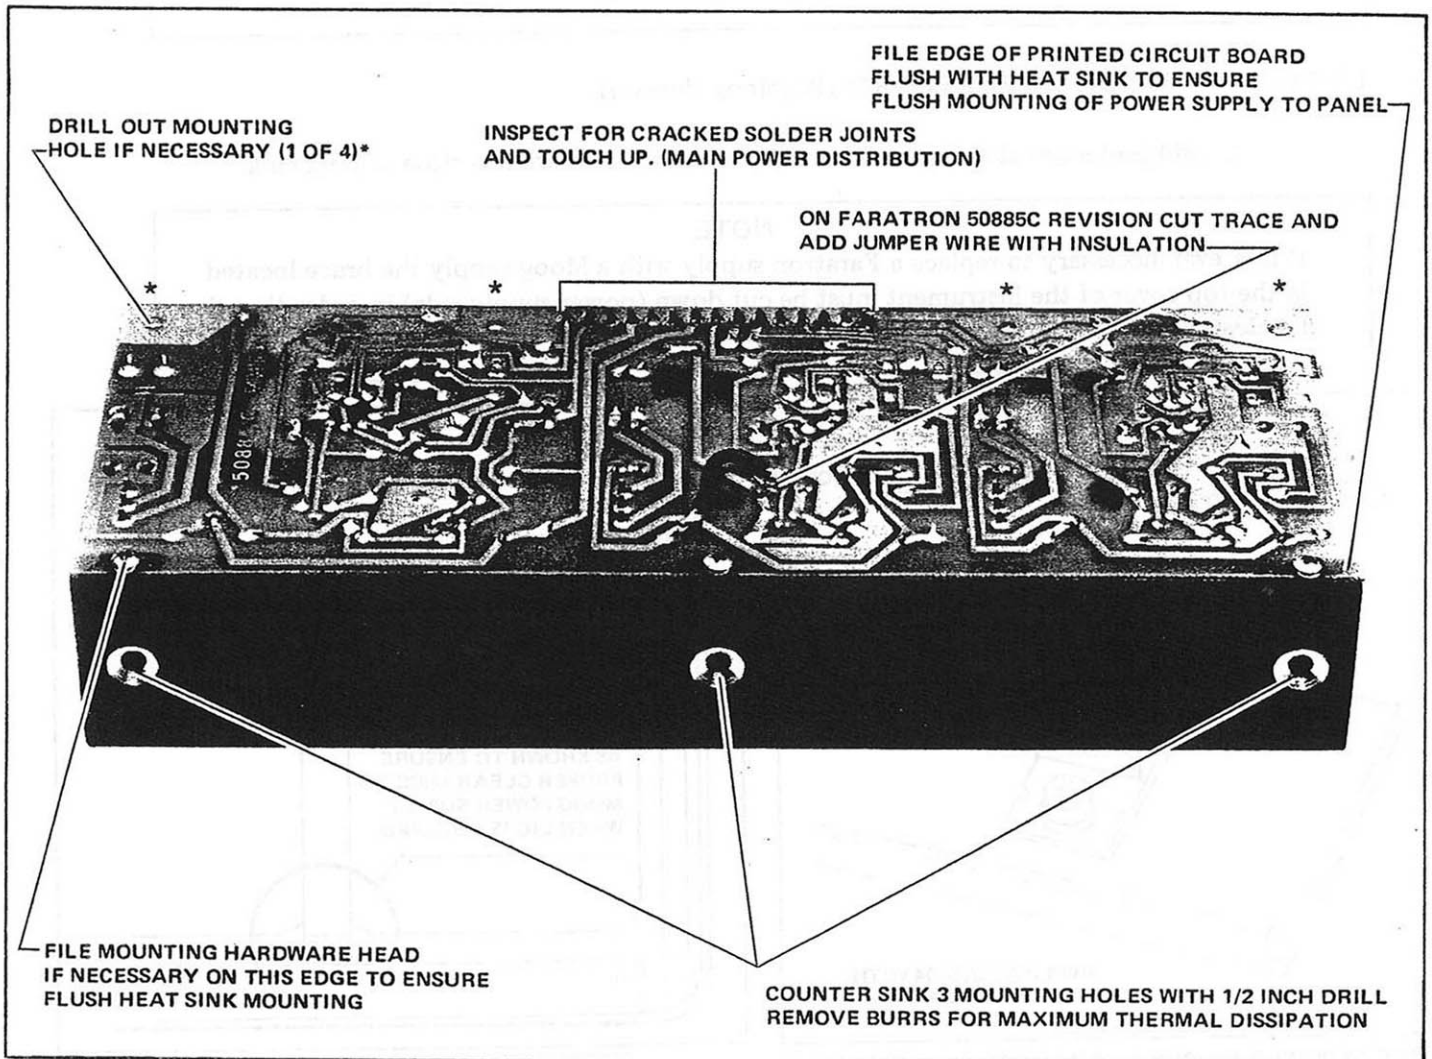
POWER SUPPLY PRINTED CIRCUIT BOARD 13
